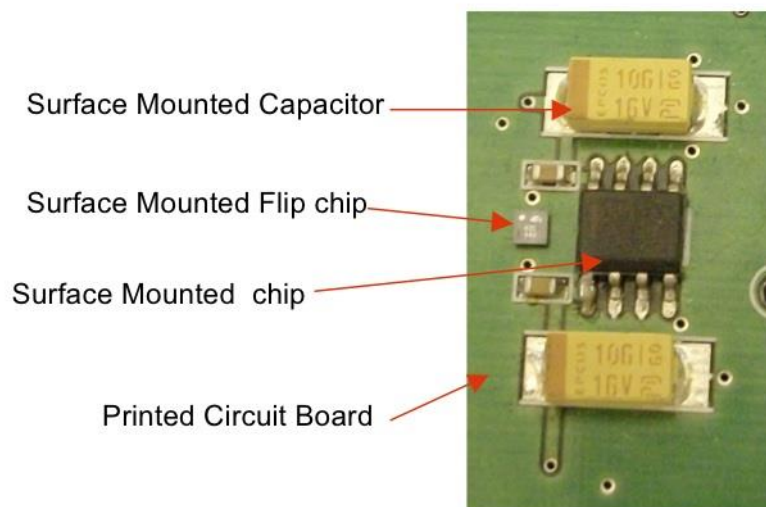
above shows a Surface Mounted flip Chip along with several other SMD components.
